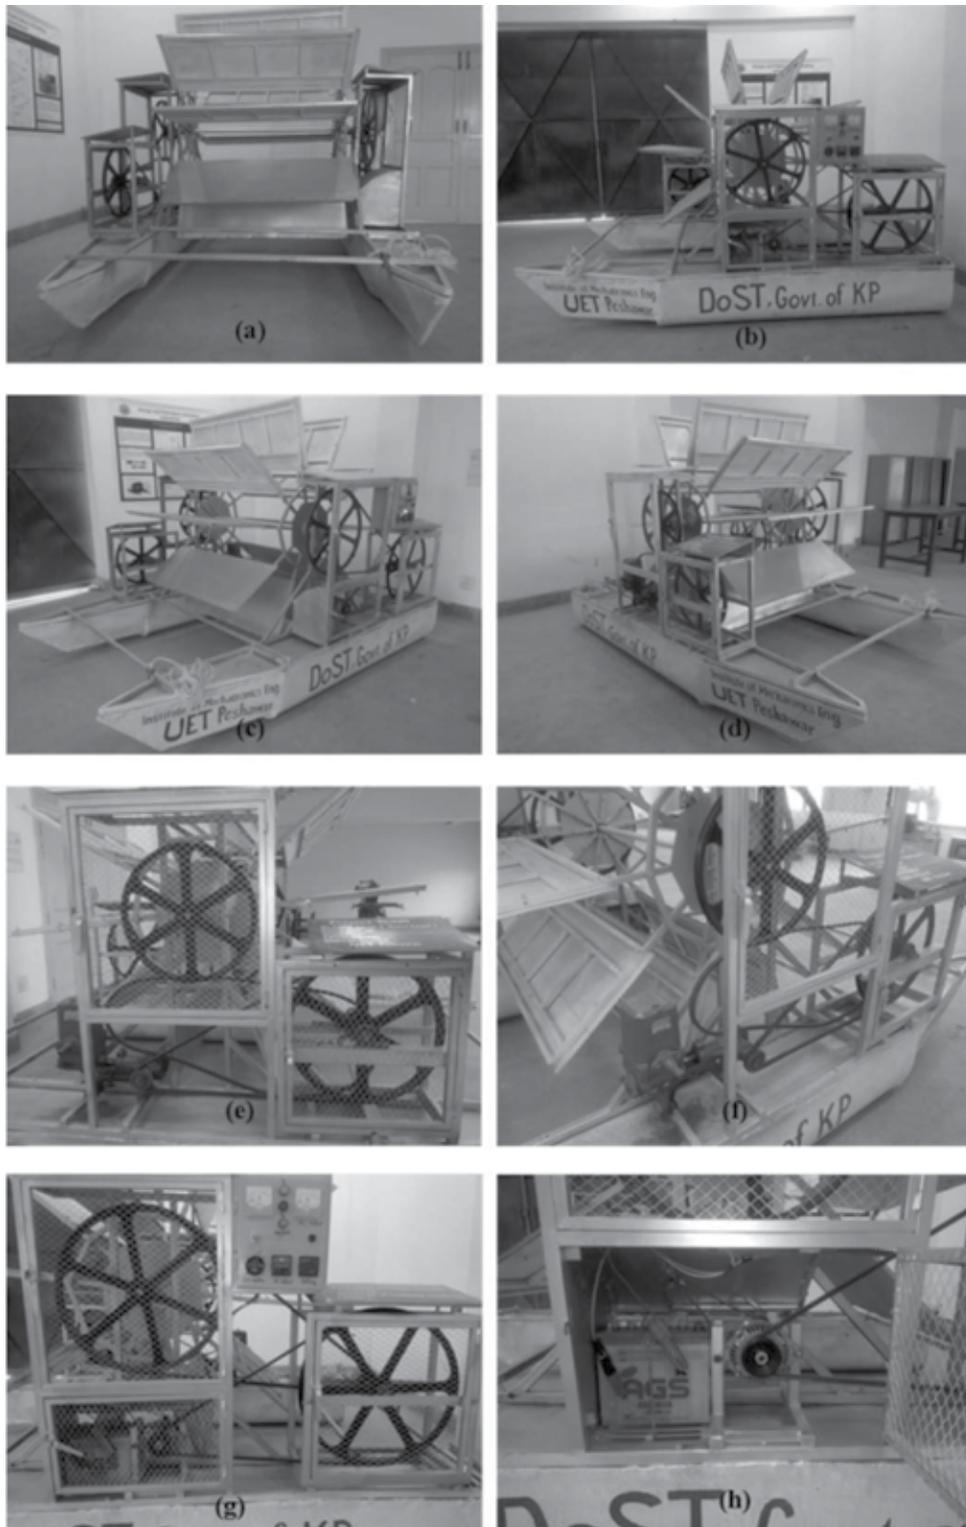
Fabrication of optimized prototype floating waterwheel: (a) Floating waterwheel front view, (b) side view, (c) right isomeric view, (d) left isomeric view, (e) pulleys and pump assembly, (f) pump close up, (g) pulleys and generator assembly and (h) battery and generator close up.
